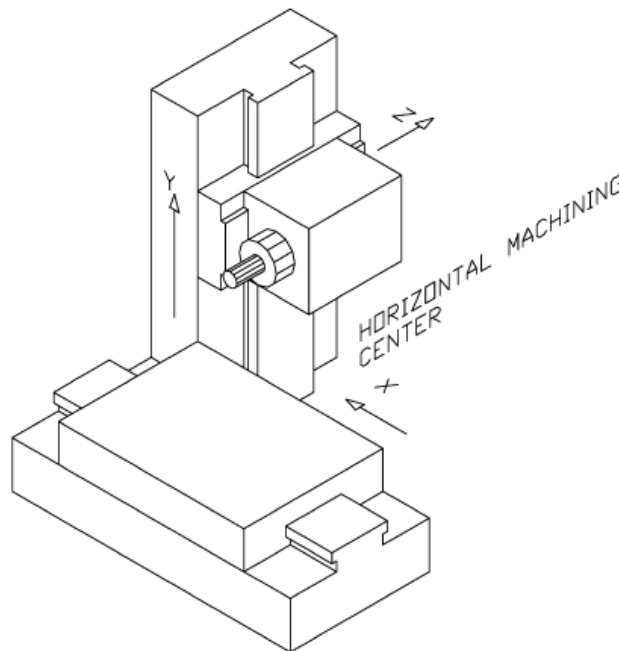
Horizontal Machining Centre (Bohez., 2002)
